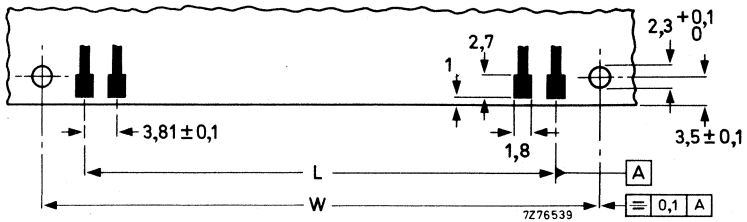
Recommended dimensions of the printed-wiring board to be fitted to the female part; see Table 5 for dimensions L and W.
